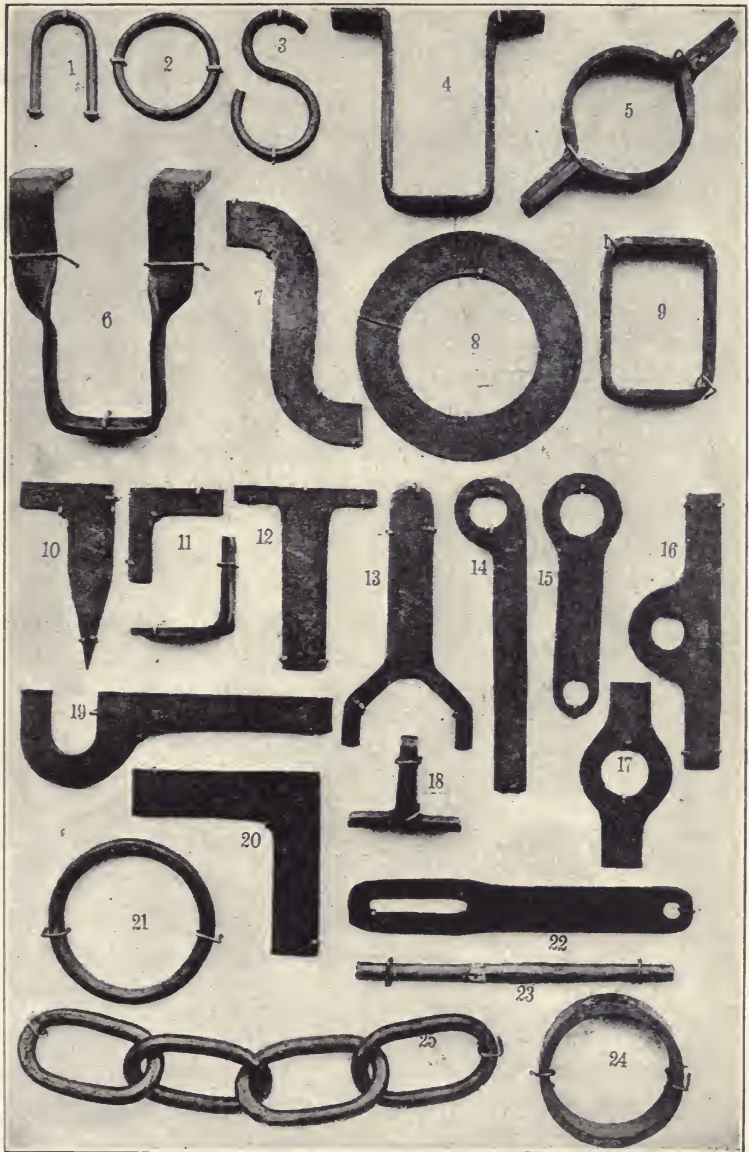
BEGINNING EXERCISES IN COURSE IN FORGING, SCHOOL OF MECHANIC ARTS, BOSTON
